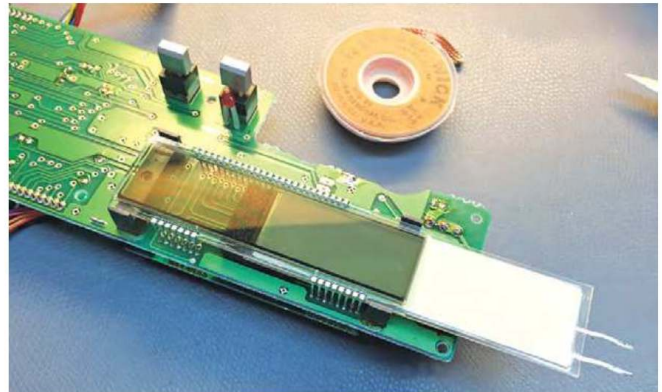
After unplugging the display board and removing the metal shield, you simply unsolder two leads and slide the original backlight panel out.
